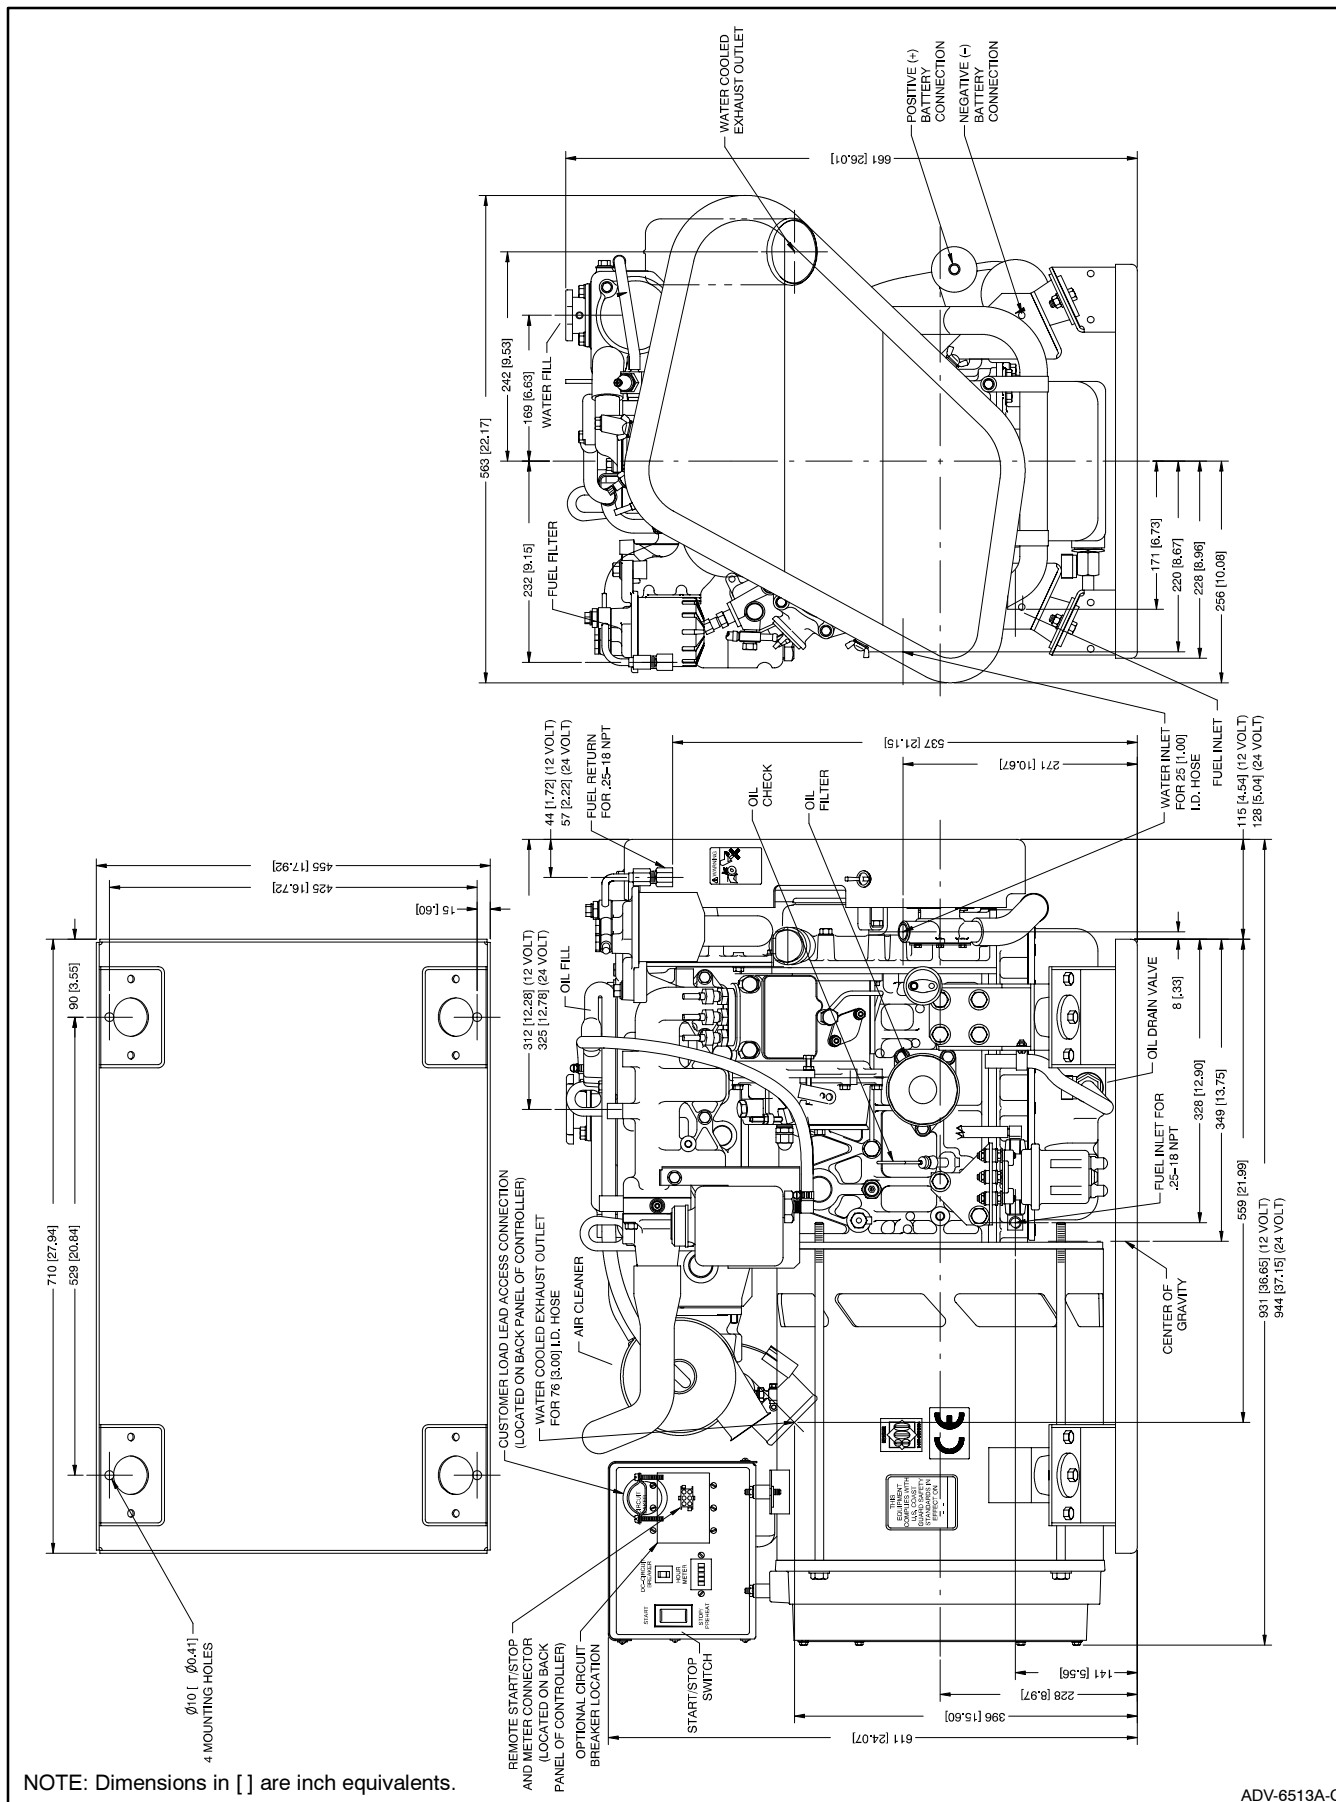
Dimension Drawing, 11.5/13EFOZ and 14/15.5EOZ
